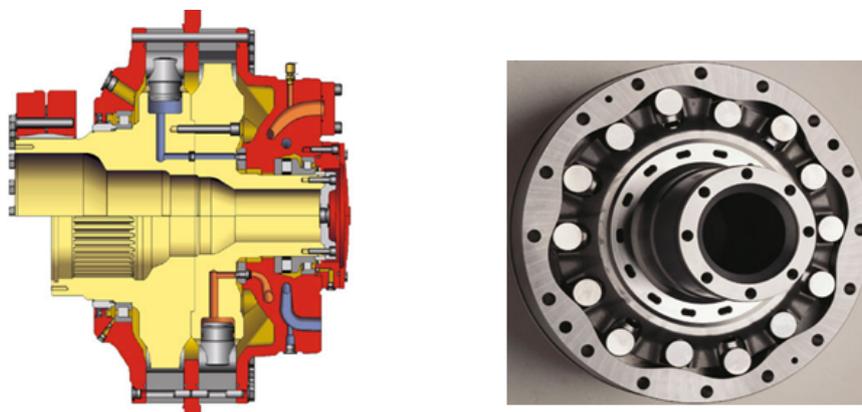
Radial piston motor (schematic (left) and real-life cross).
